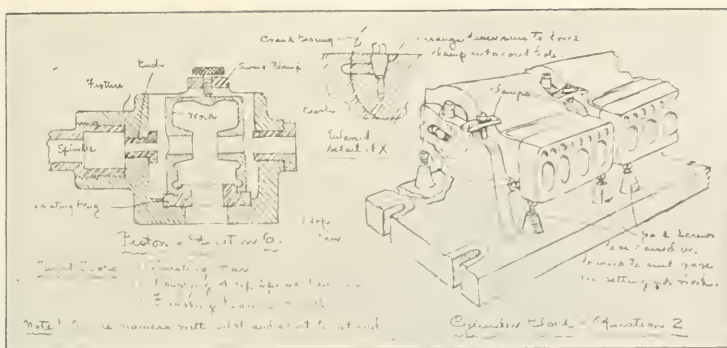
Examples of Free-hand Sketches made by Tool Engineer to explain his Ideas to Tool Designers. illustrating Operation 6, Table I, and Operation 2, Table III
